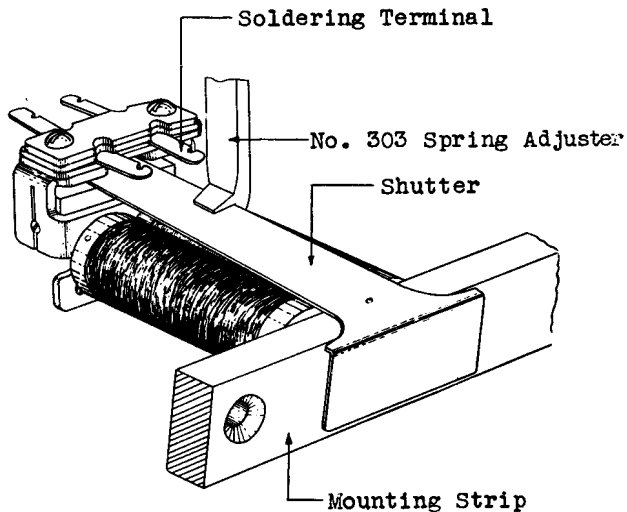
Method of Adjusting the Shutter with the No. 303 Spring Adjuster
